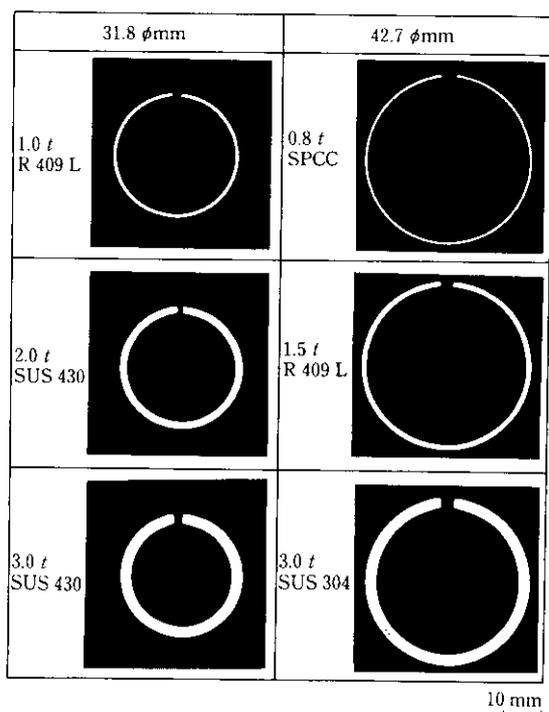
Shape of cross section of formed sheet passing through after squeeze roll without welding
